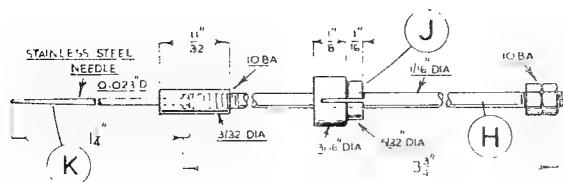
H—the valve spindle; J—the spindle collar; K—the paint needle
